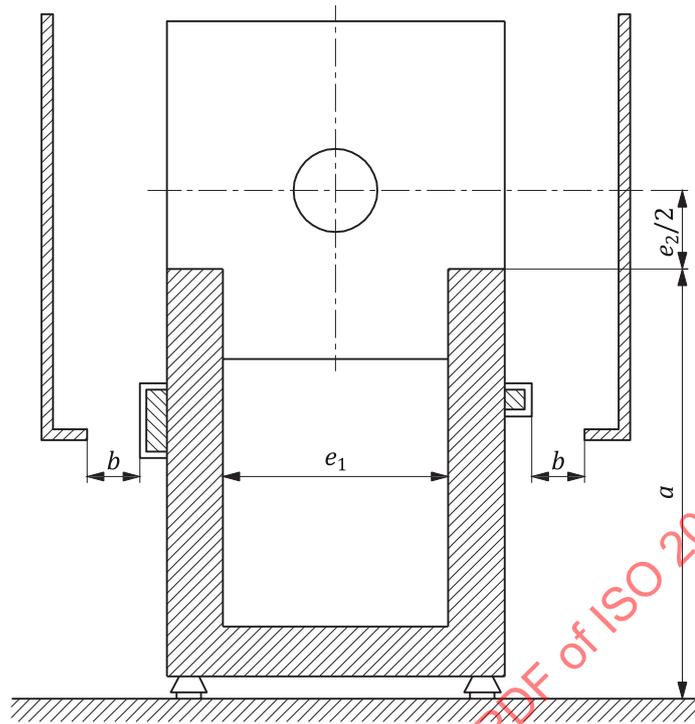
Examples of the positioning of movable guards and dimensions a , b , e_1 , e_2 for machines with horizontal clamping unit without tie-bars
